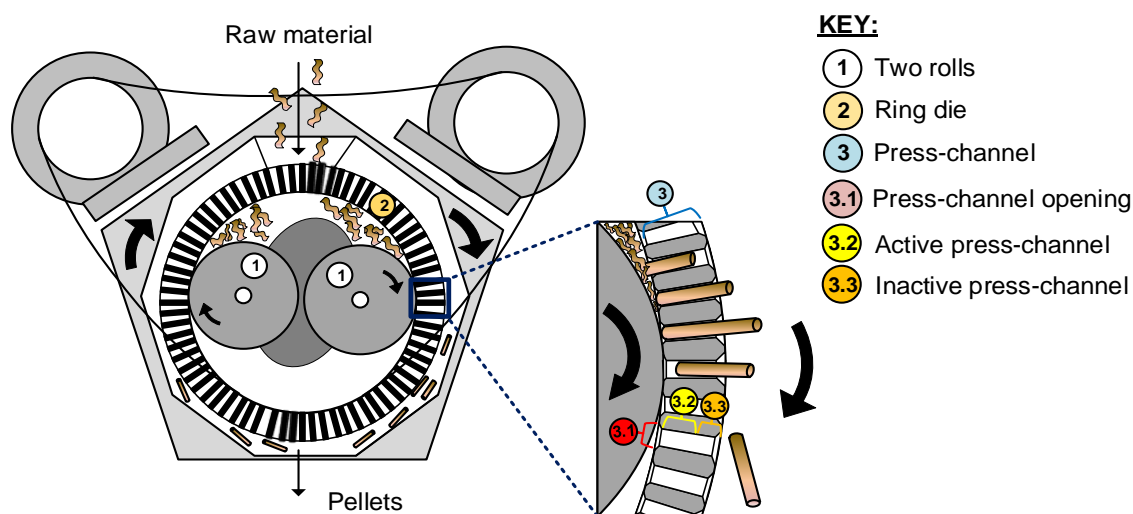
Ring die press machine and mechanism, redrawn from [173]
